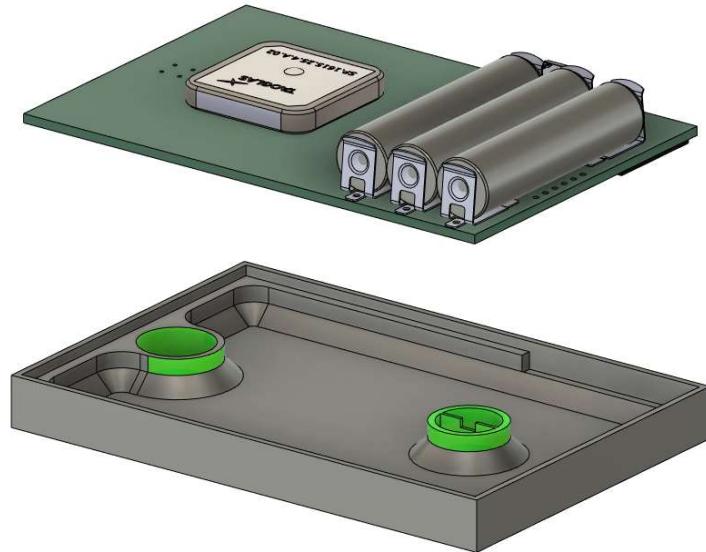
The PCB and associated tray, with sensor holes highlighted.
